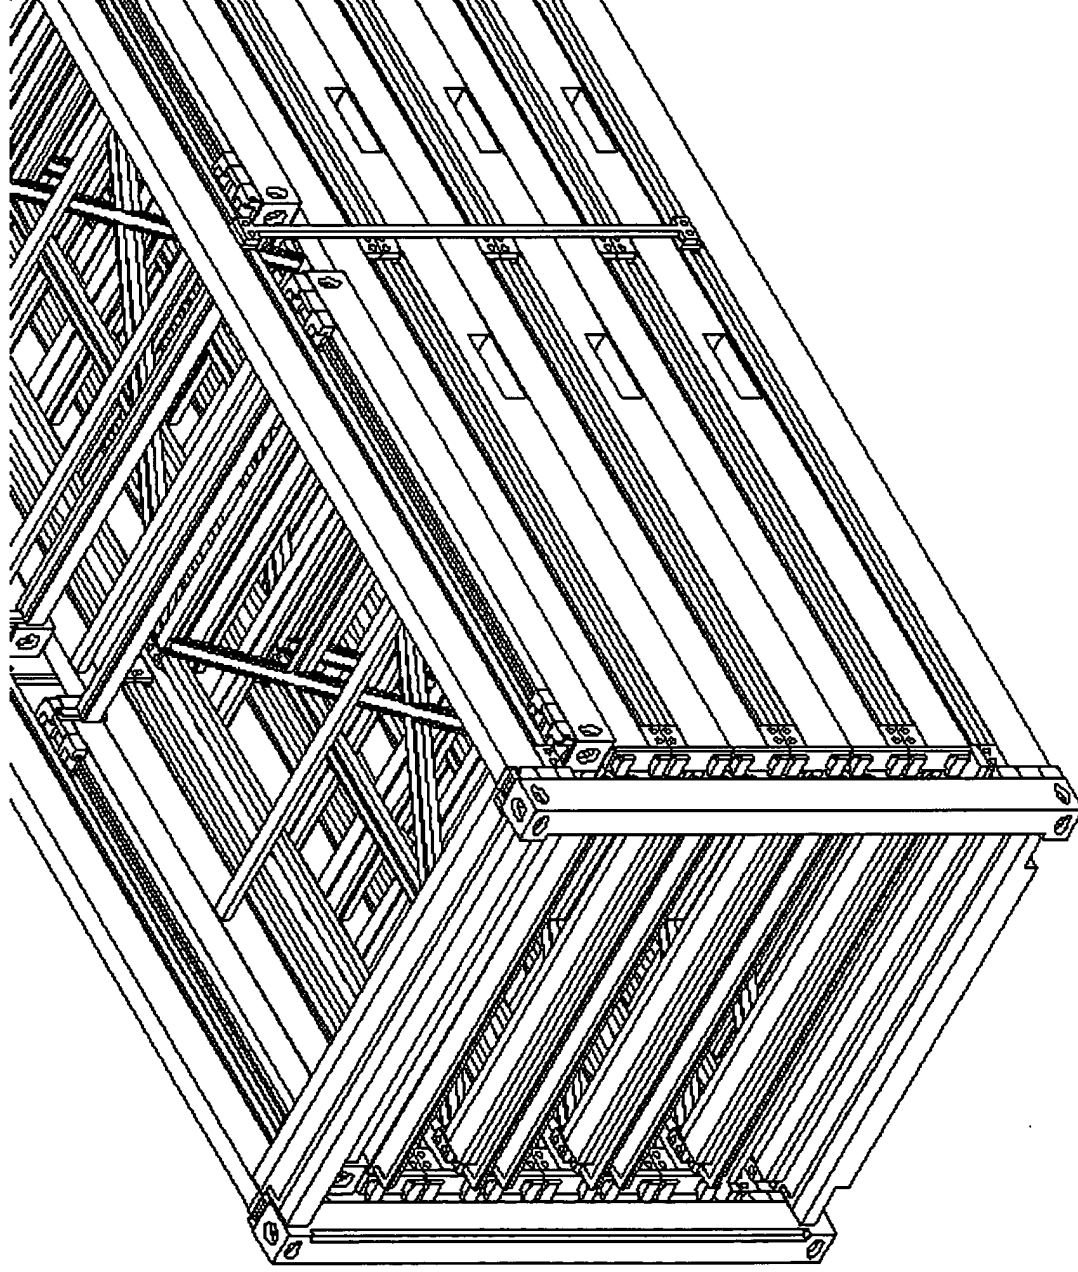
C: Detailed isometric view of the 40 foot collapsible cargo container frame loaded with six collapsed 20 foot collapsible cargo container frame panels
